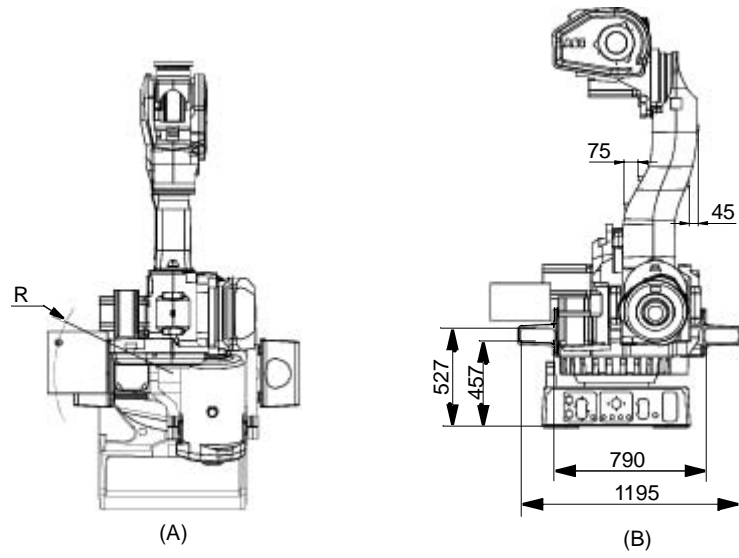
Extra load on the frame of IRB 6600 (dimensions in mm).
